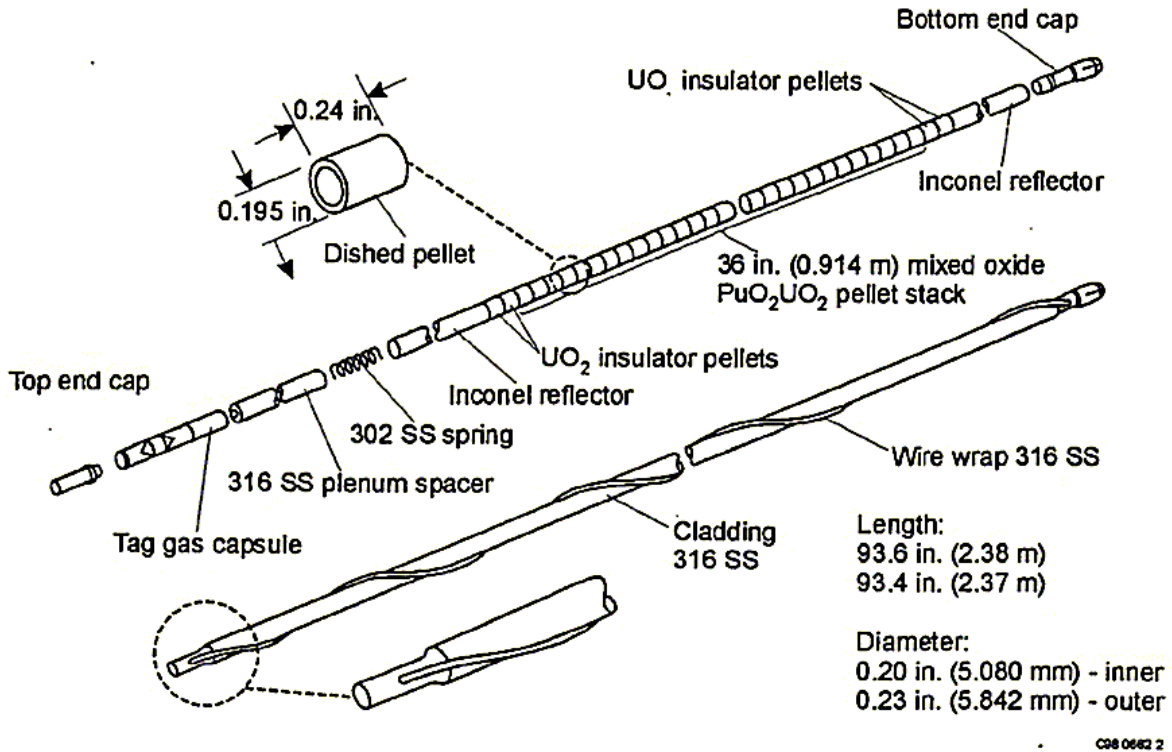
Simplified Axial View of a Standard FFTF Driver Fuel Assembly Fuel Pin
